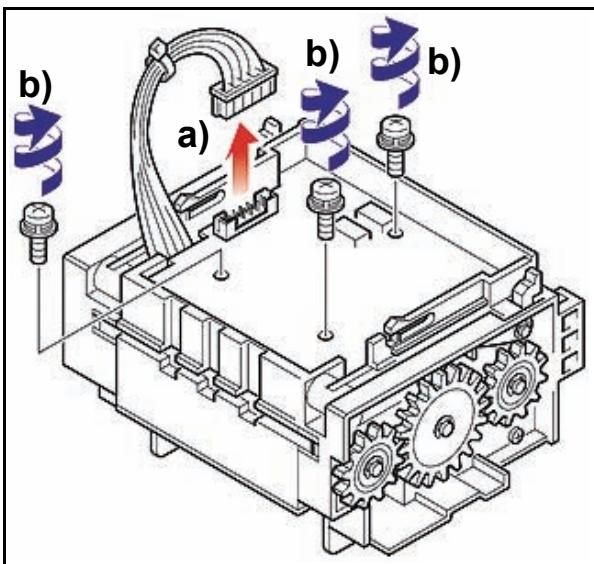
WBA Acceptor's Upper Sensor Board Removal
